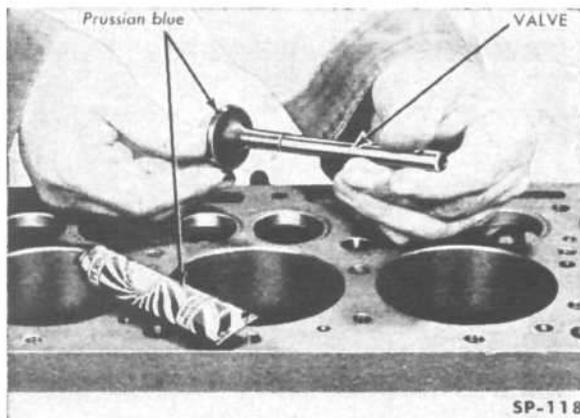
CHECKING FIT OF VALVE IN VALVE SEAT
